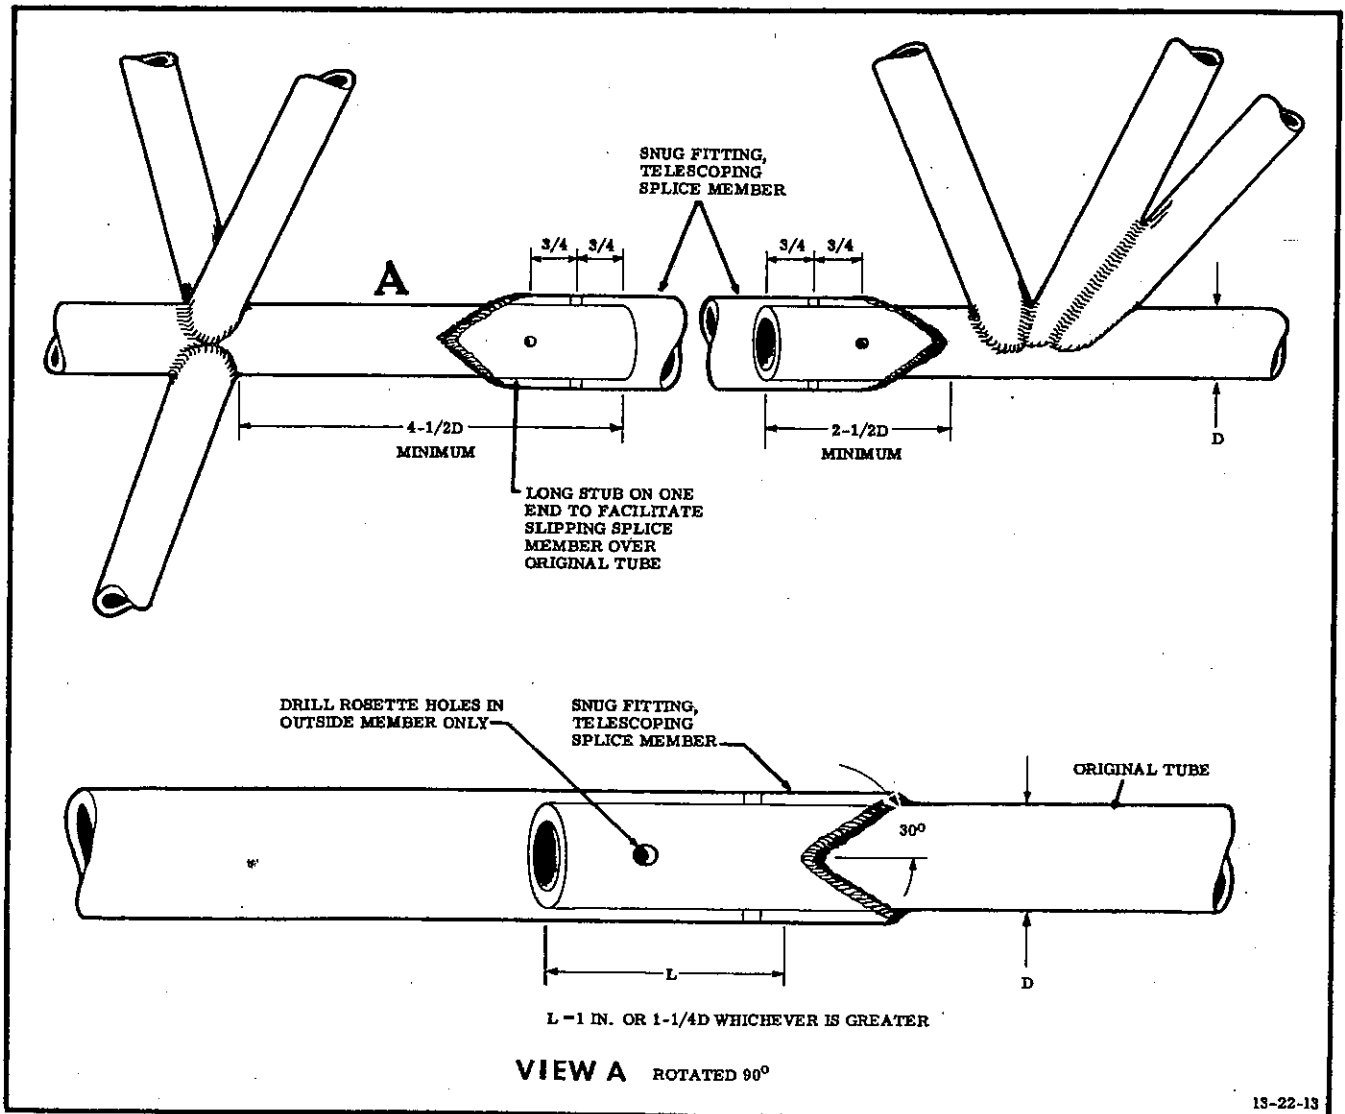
Fishmouth Splice using Larger Size Replacement Tube
